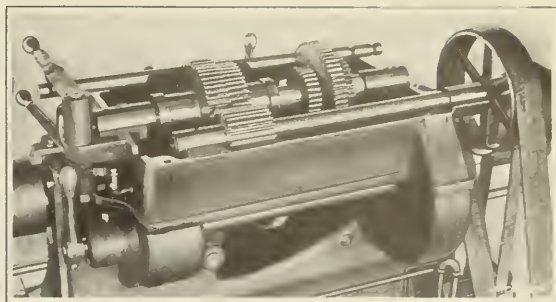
Arrangement of Gearing in Head of Foster Screw Machine
